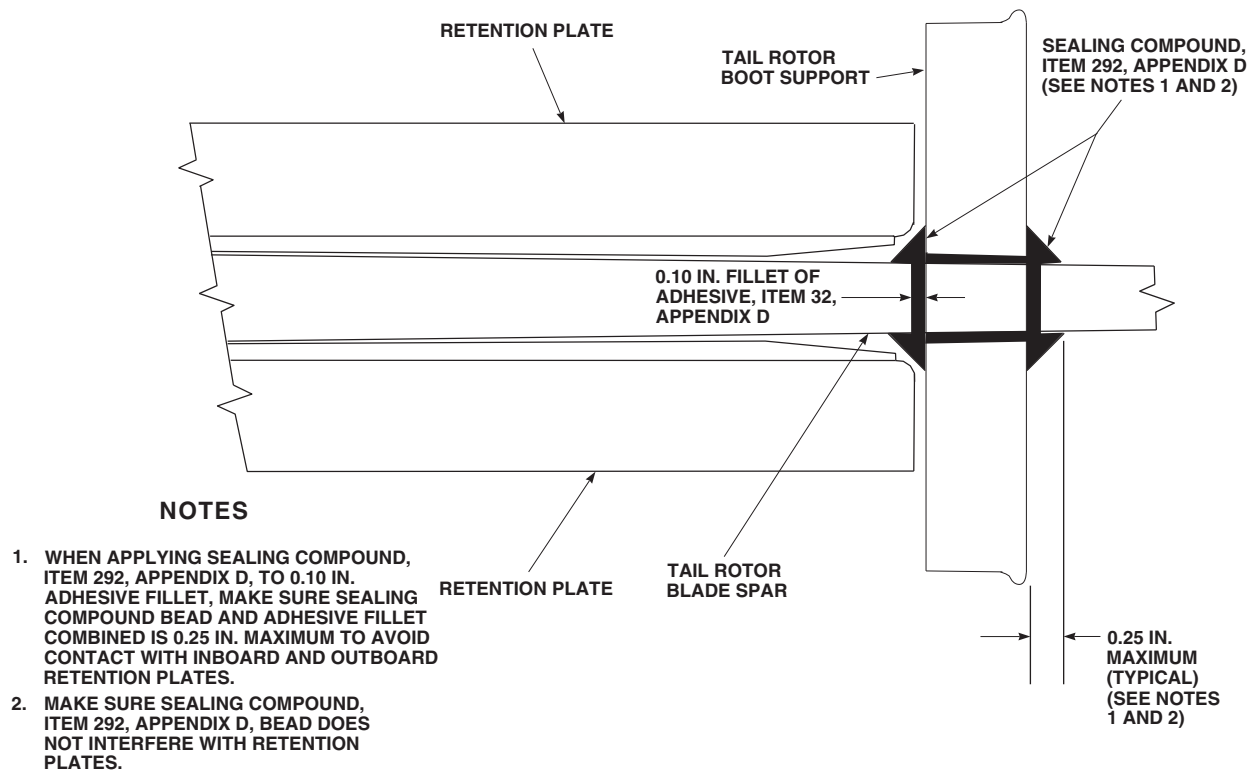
APPLICATION OF SEALING COMPOUND TO TAIL ROTOR BOOT SUPPORT
